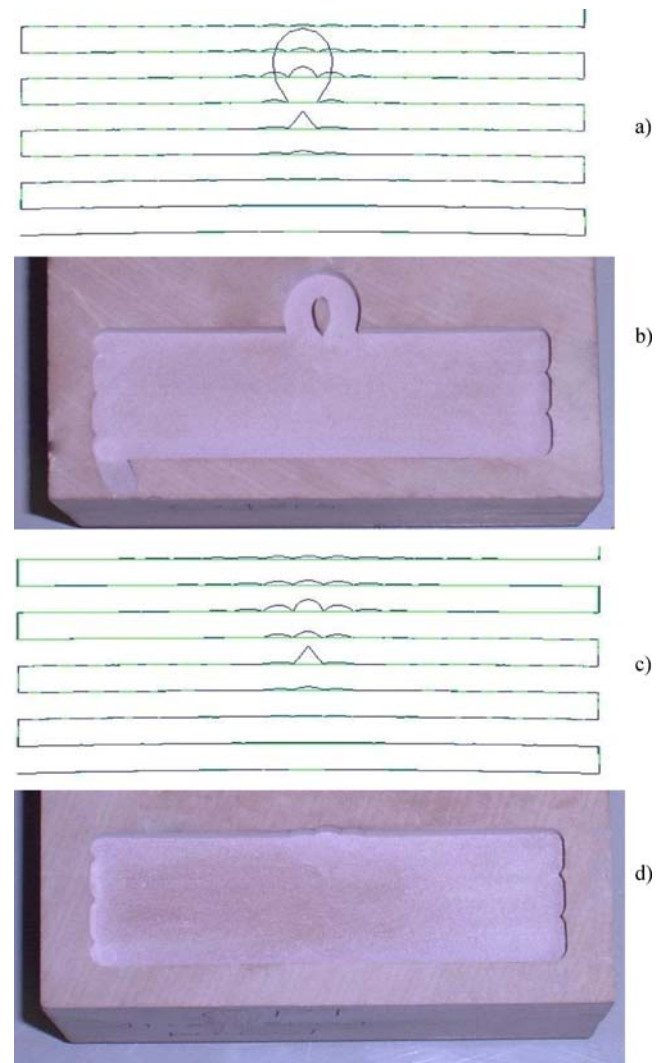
a Conventional tool path simulated by the virtual machine. b Surface S_1 machined by HERMLE UWF902H. c Optimized tool path, simulated by the virtual milling machine. d Optimized surface machined by HERMLE UWF902H
